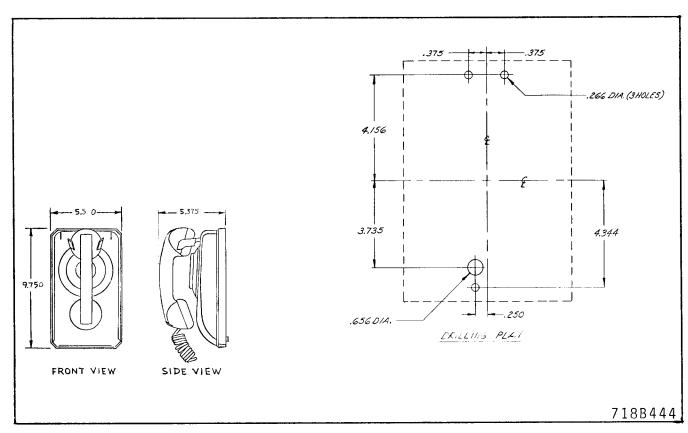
Outline Dimensions for Wall mounted Hookswitch
